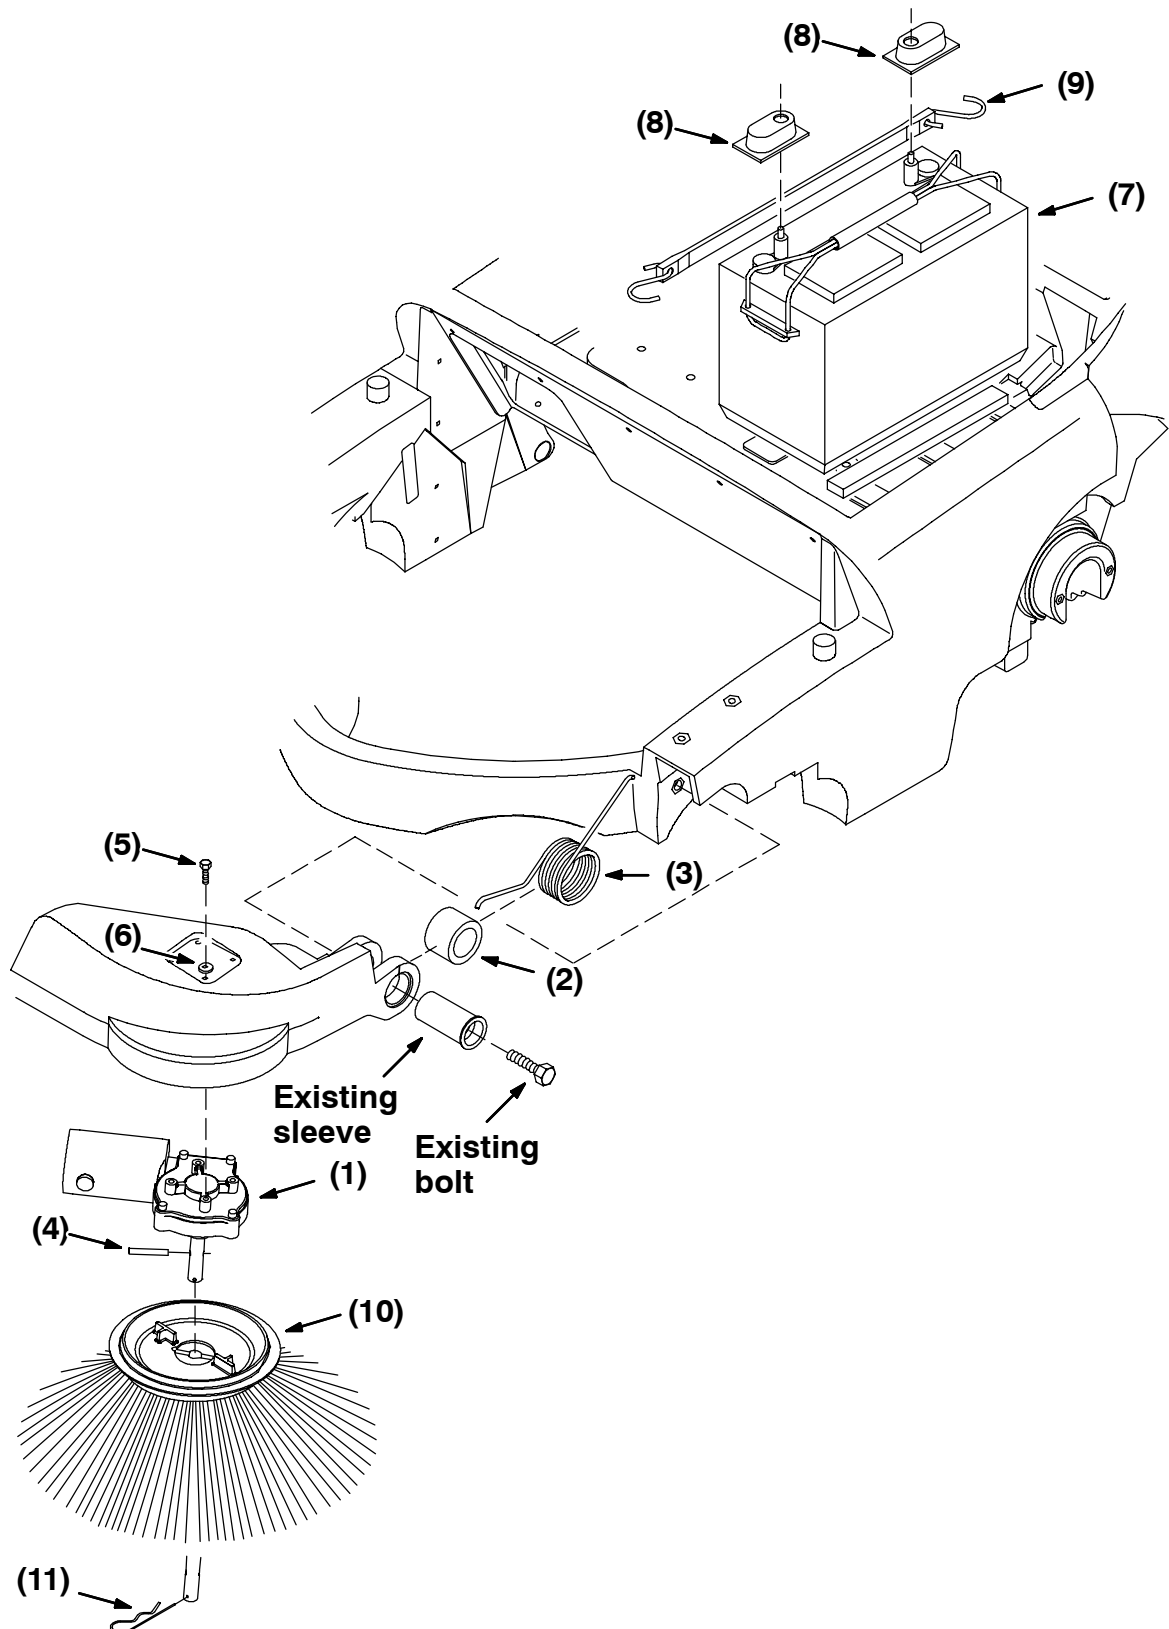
Left Hand Side Brush Assembly 378763 (24V)
